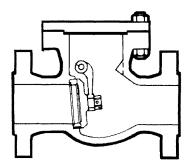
A typical on-piece body cast swing disc non-return valve
